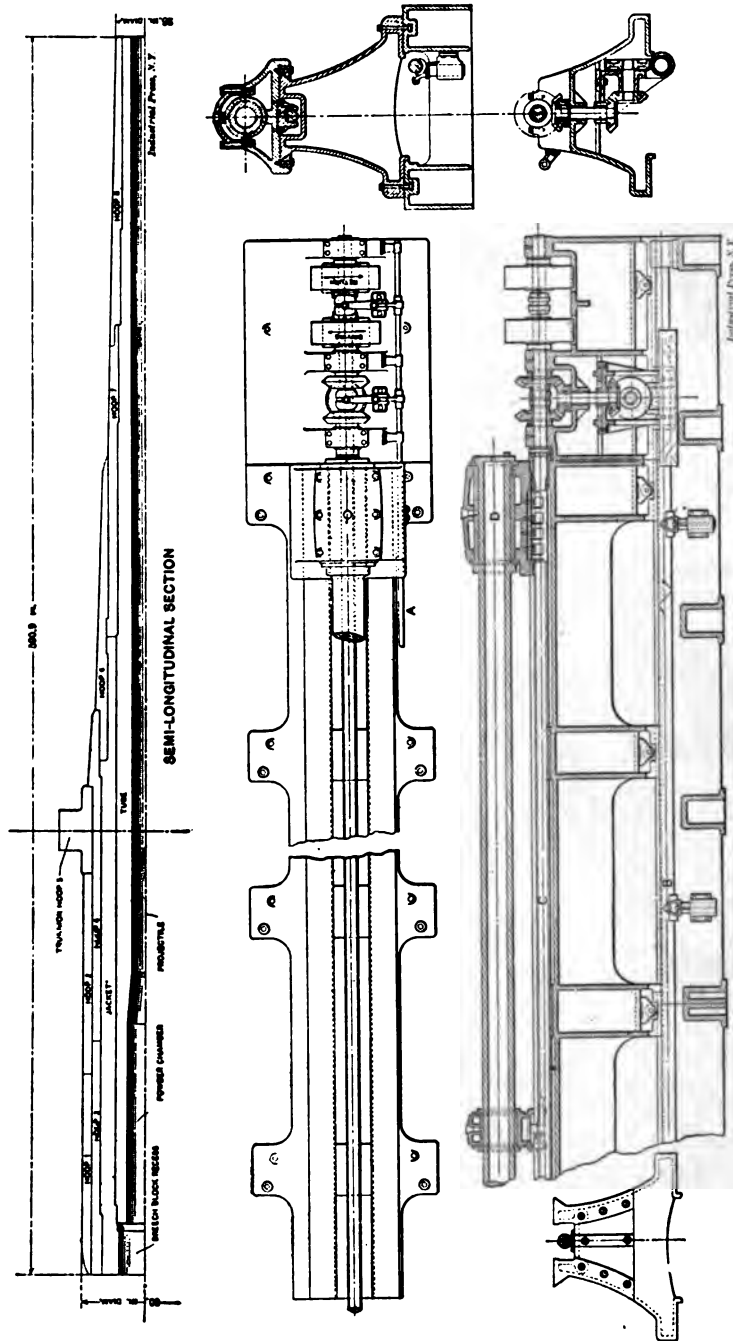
Detail Drawing, showing Hoops on 16-inch Gun, and Plan and Sectional Elevation of Boring and Reaming Bar for 16-inch Gun Lathe
